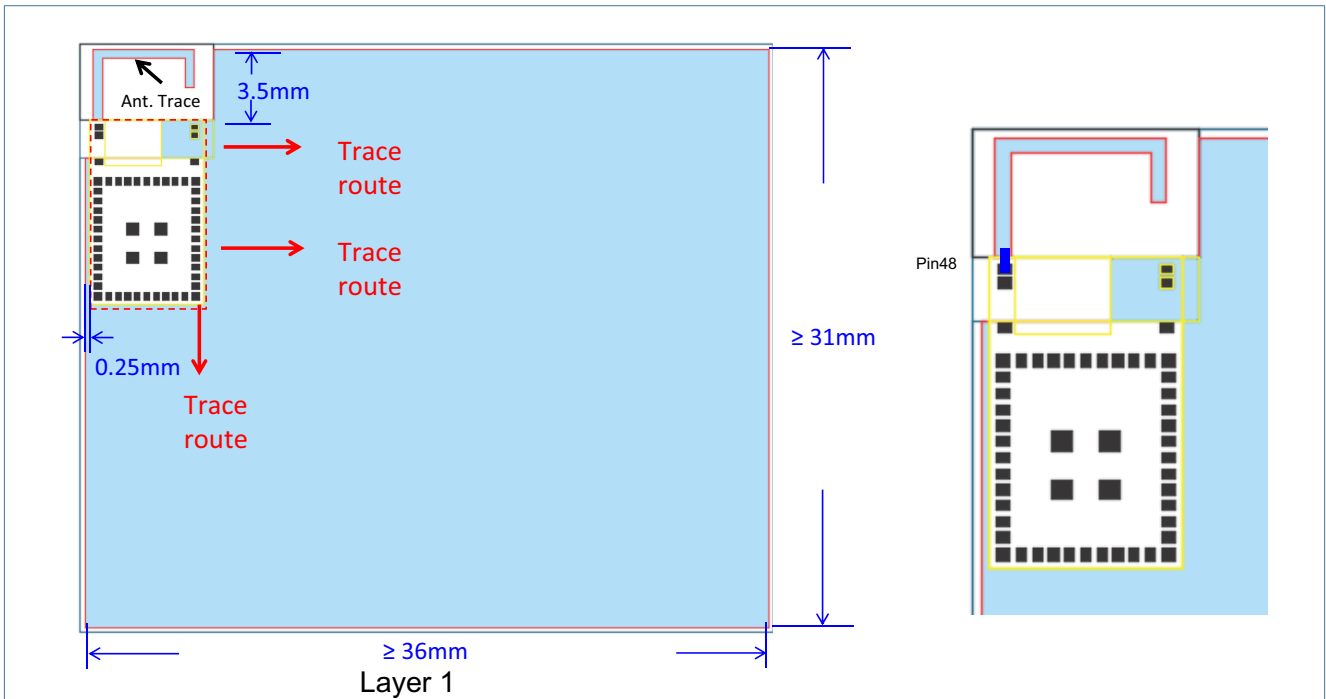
QN9080-001-M17 module on 36 mm x 31 mm GND PCB layout guide - corner - clearance area
